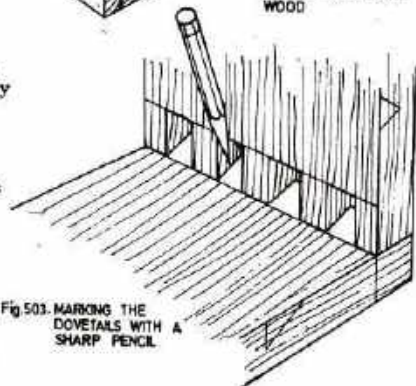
MARKING THE DOVETAILS WITH A SHARP PENCIL
